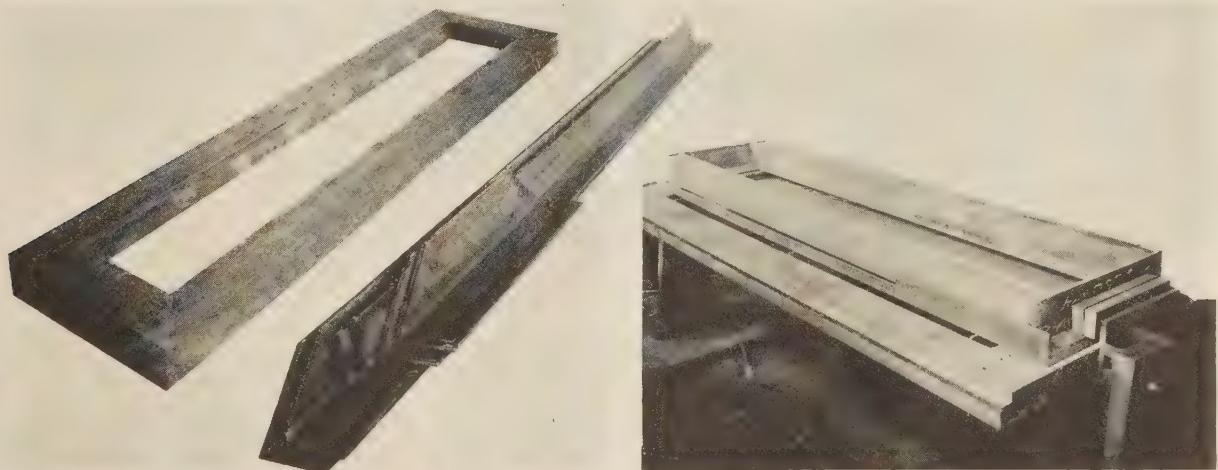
WELDED BEDPLATE MADE FROM SHEARED ANGLES WELDED COMPLETE IN ONE POSITION
